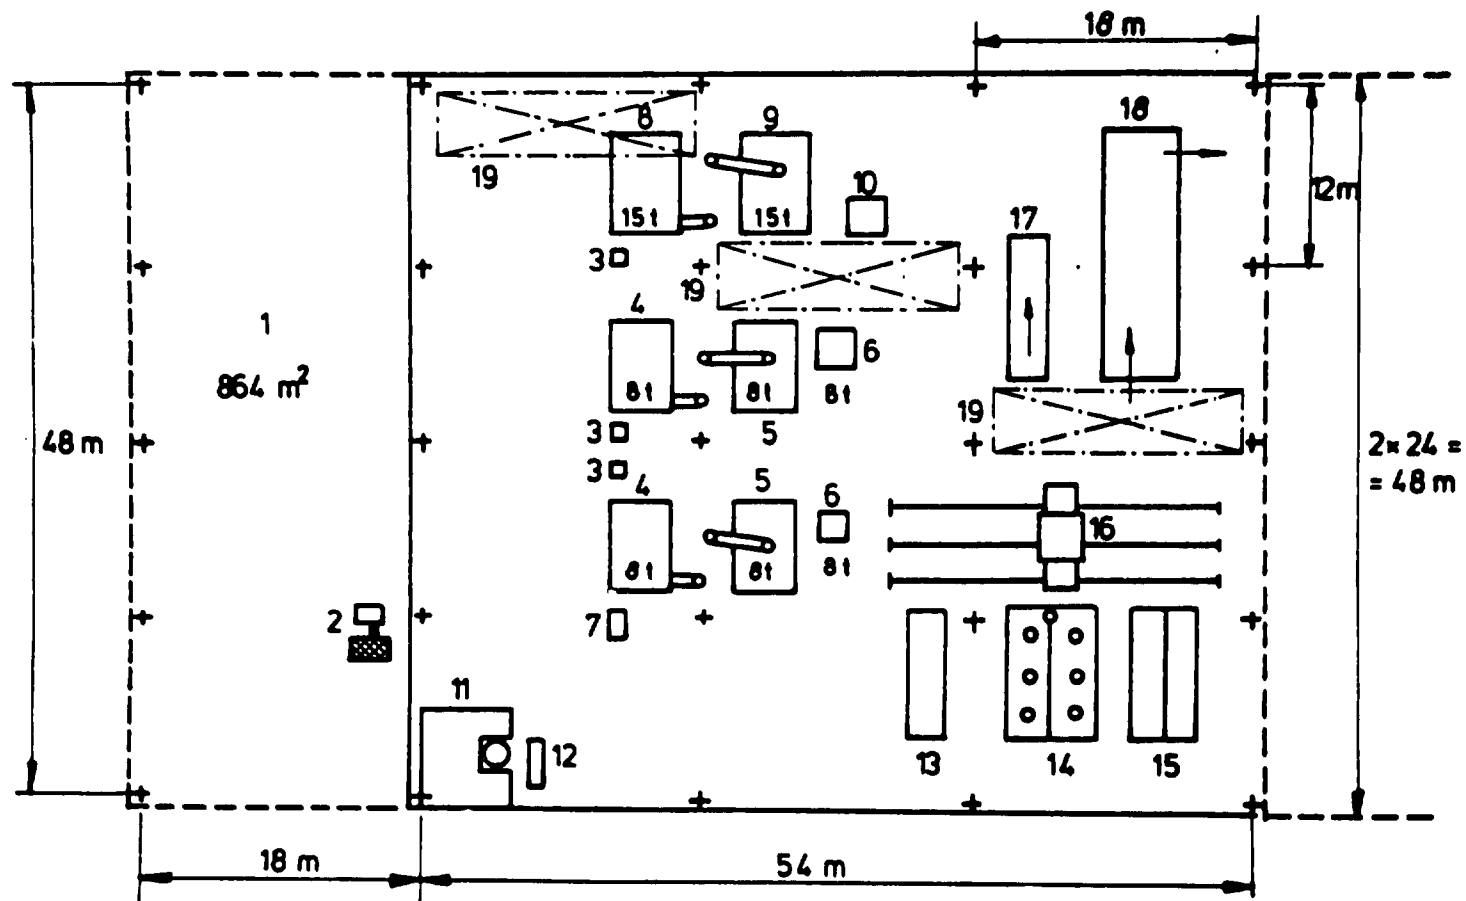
Traditional slab and billet casting shop with vertical casting machines (capacity 16 000 tpy)
